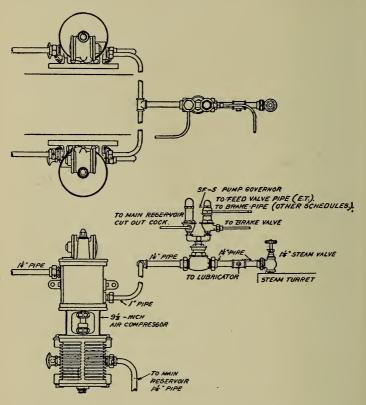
Diagrammatic Illustration of Connections Between 1¼-inch Steam Valve, 1¼-inch Governor and Two Air Compressors, One on Each Side of the Boiler. This Represents Sequence of Parts Only and Not Exact Location on Engine.
